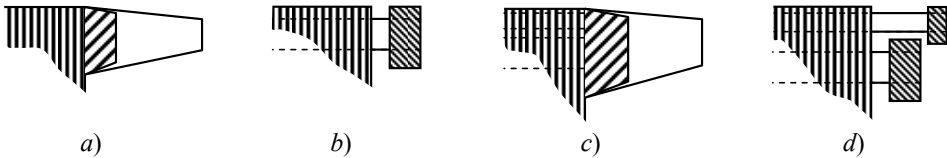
End rings: single cage (a – casted, b – welded), double cage (c – casted, d – welded)
